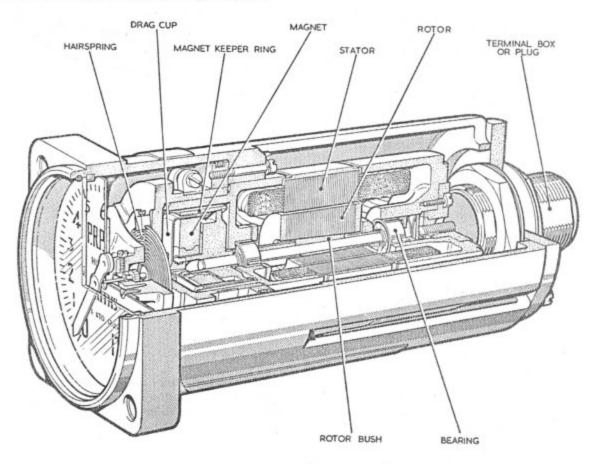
Cutaway view, Type KTD 1200 series indicator
